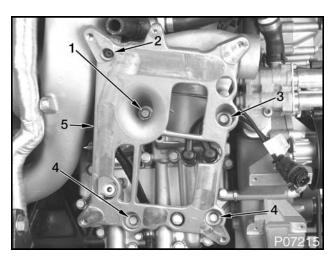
Low Pressure Charge Air Cooler (LPCAC) bracket
